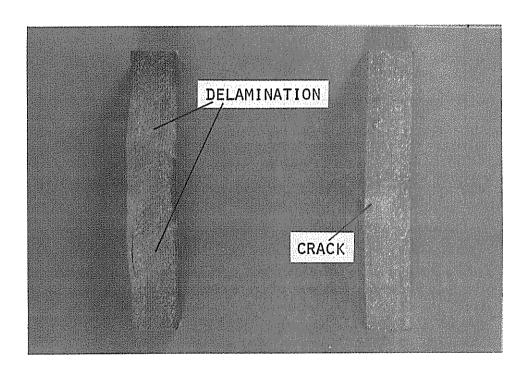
Shear fracture (left) and fiber fracture (right) of GFC
